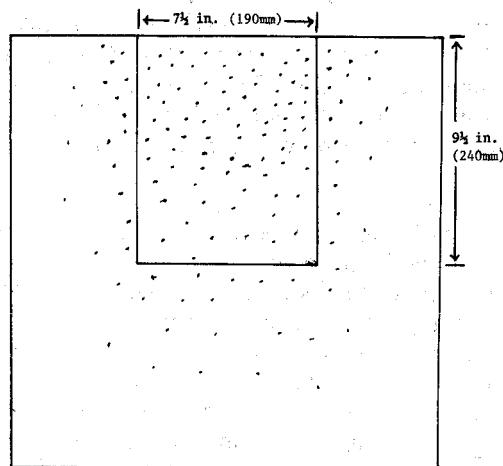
Cutting Out Section of Spatter Catch paper for Evaluation
